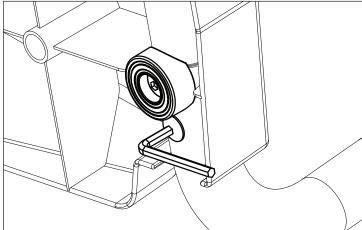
Fully tighten all Boarding Platform Bolts using the 5mm Allen Wrench.
